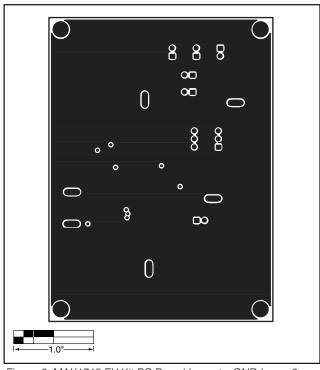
MAX1715 EV Kit PC Board Layout—GND Layer 3
